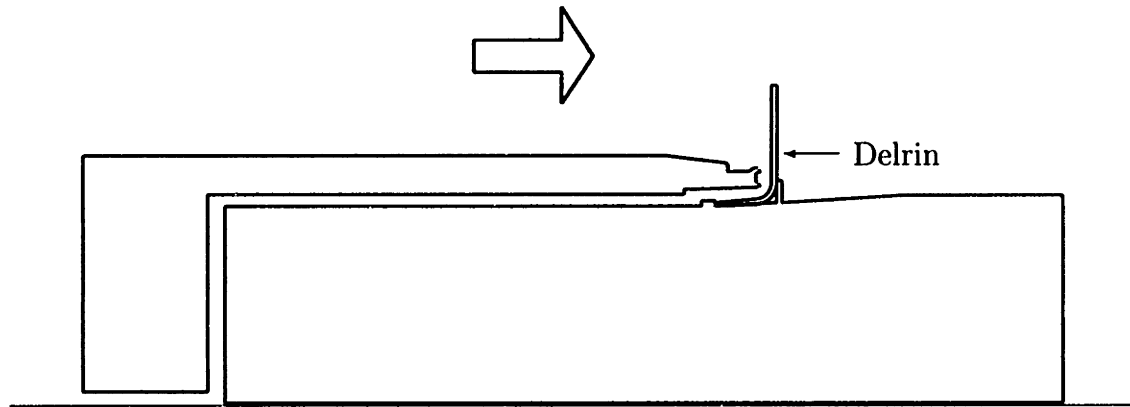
Initial press: Side and bottom flexure mechanism dies.
